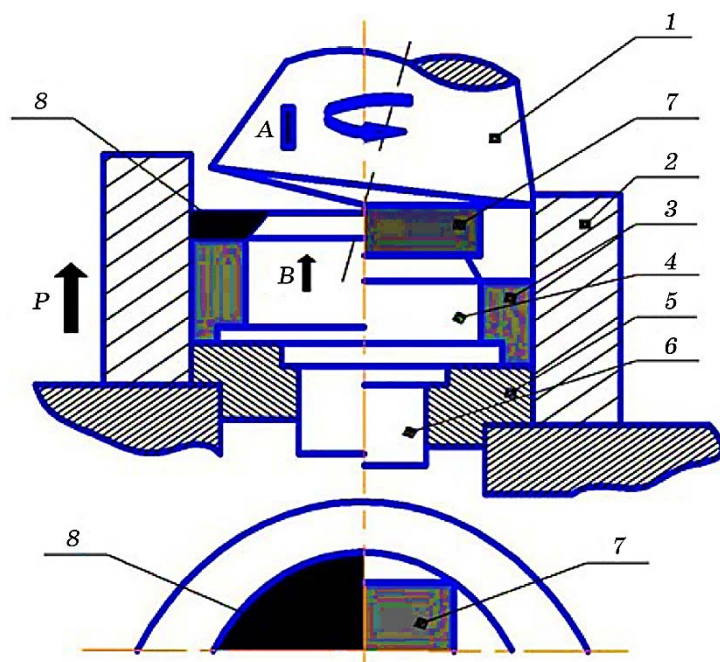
Setup scheme for rolling stamping of flanged parts and blanks: 1—punch; 2—container; 3, 4—matrix; 5—ring; 6—ejector; 7—starting workpiece; 8—finished part.
